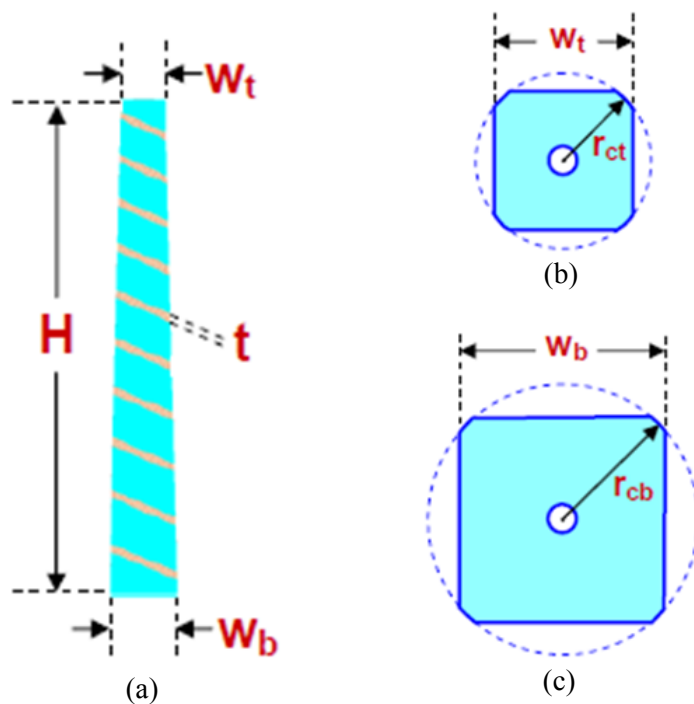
GPS dimension; (a) side view, (b) top view, (c) bottom view.
